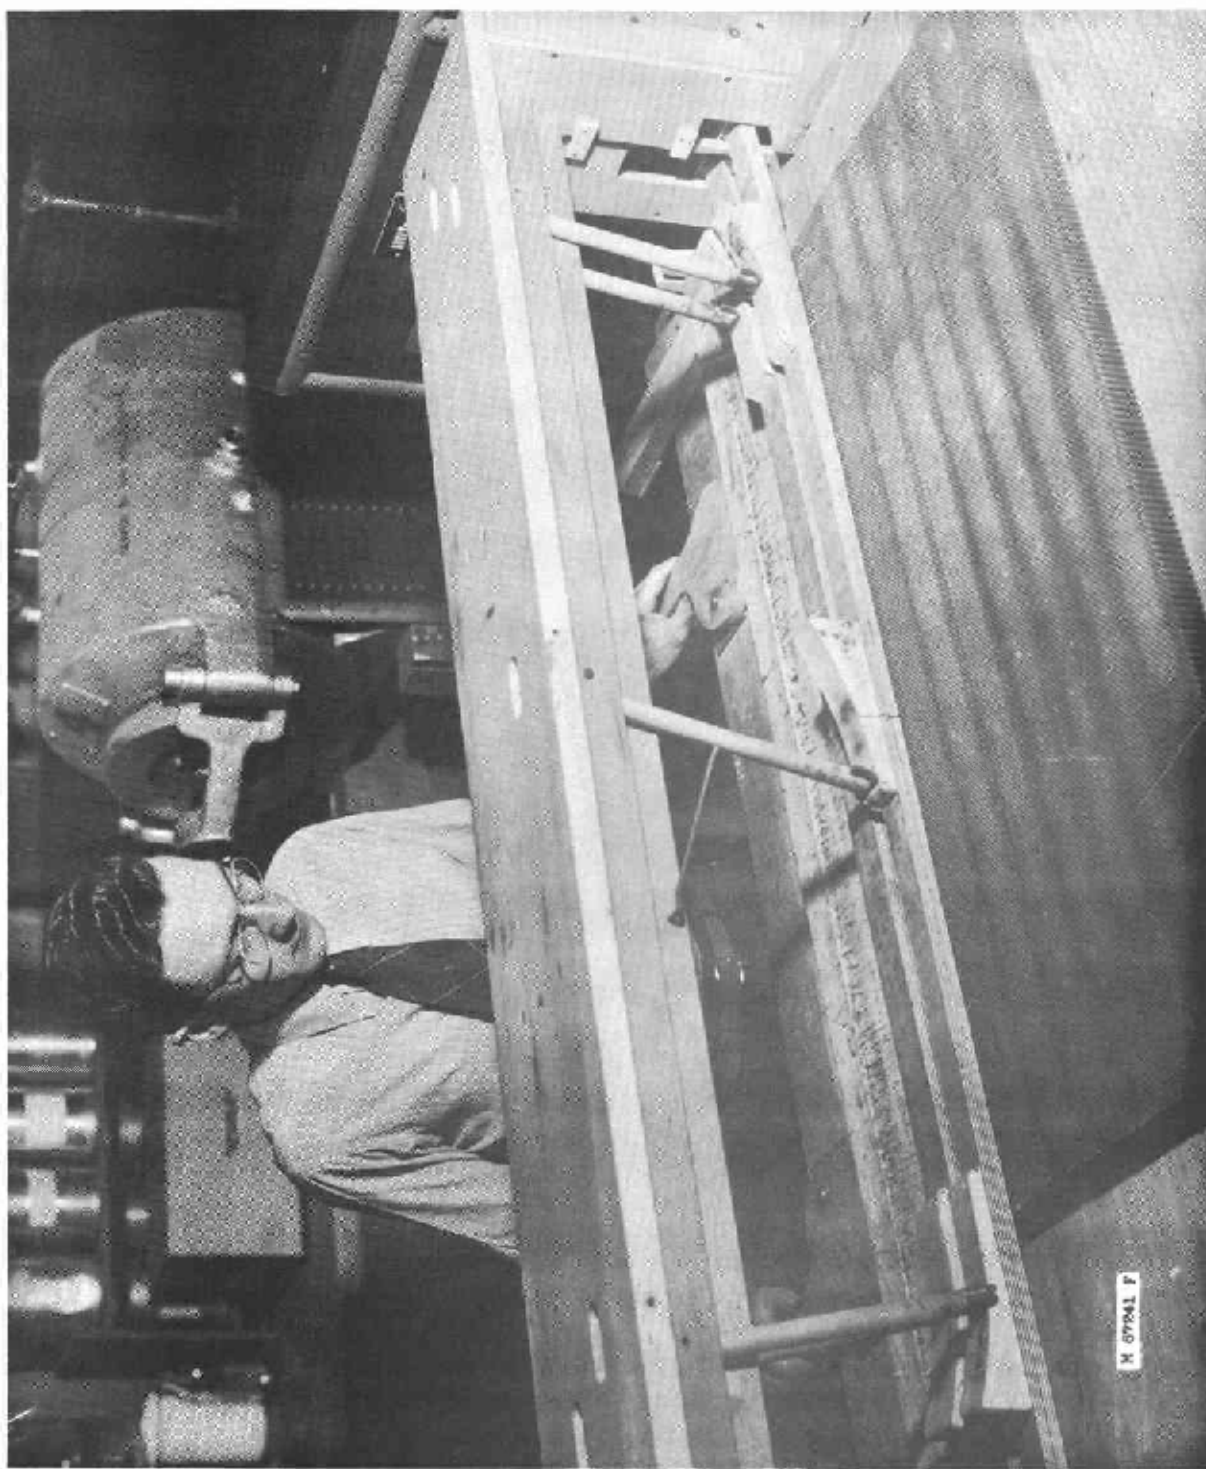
Gluing the strips of paper honeycomb into a panel, in the high-frequency edge-gluing machine.
